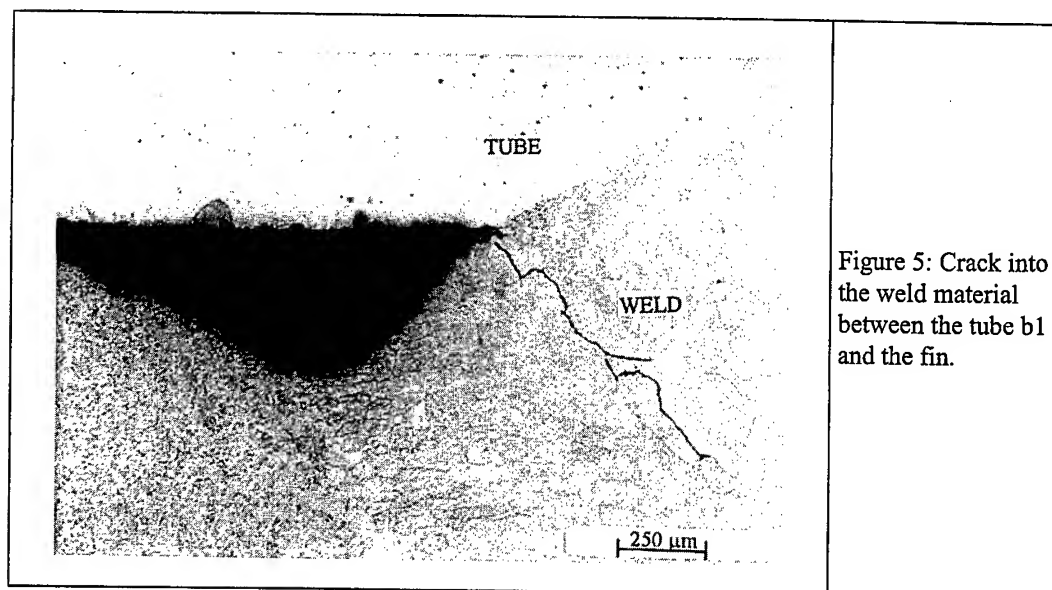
Crack into the weld material between the tube b1 and the fin.
